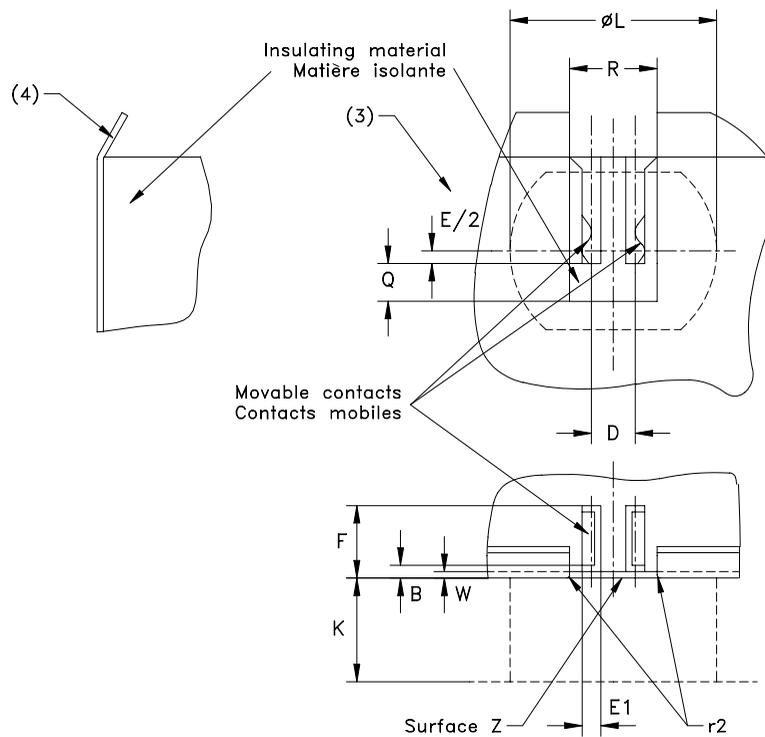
CONTACT ASSEMBLY WITH PARALLEL SLIDE-IN GROOVES
